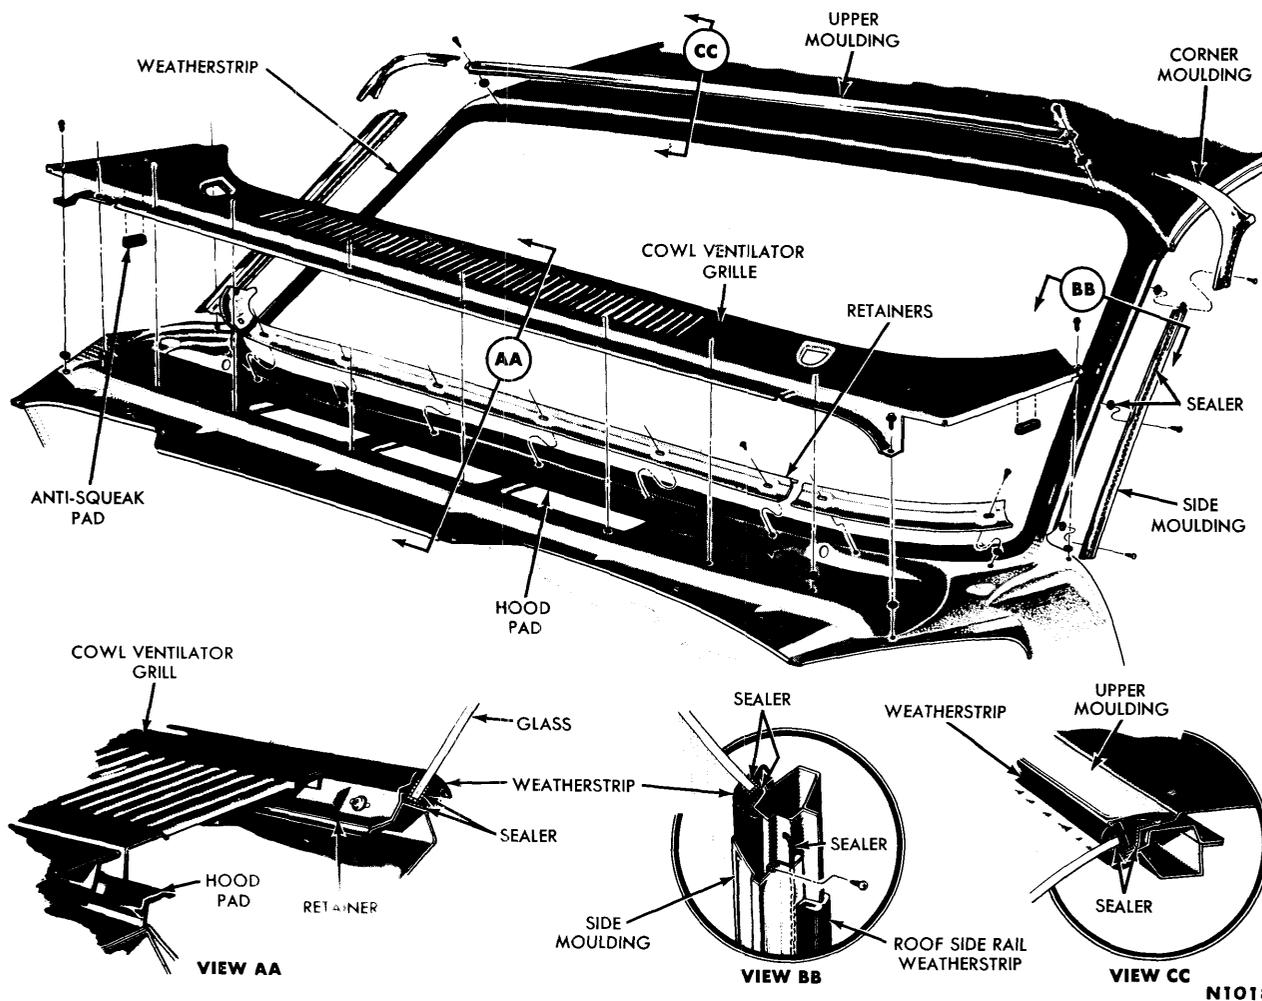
Hardtop Model Windshield and Exterior Mouldings
